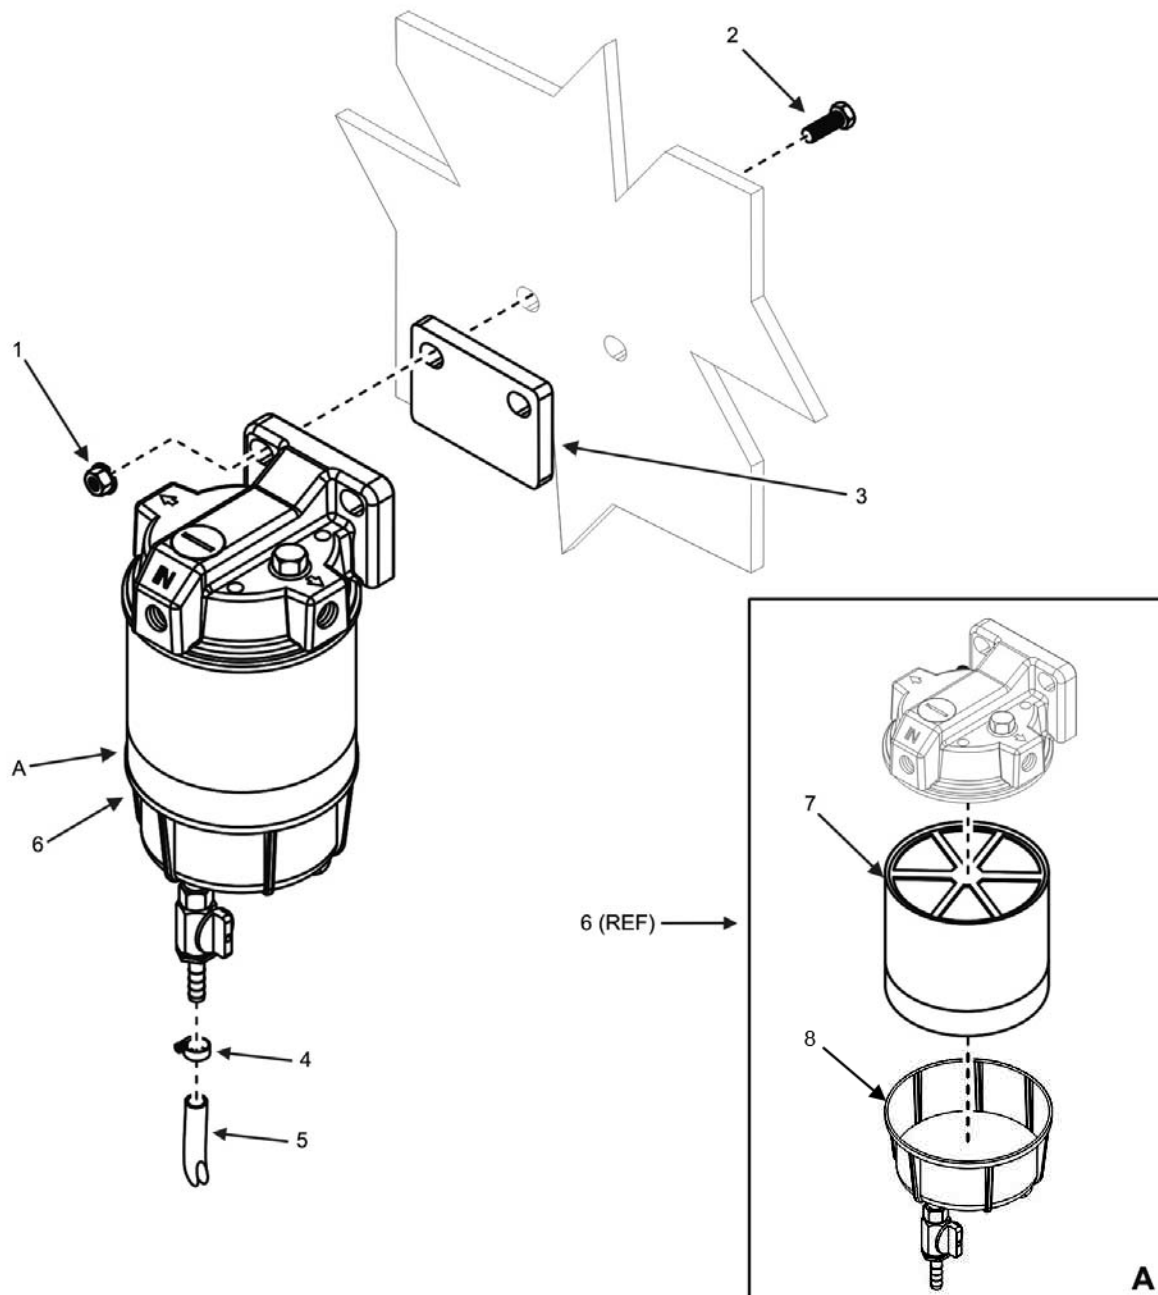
Fuel Filter/Water Separator Assembly (Sheet 1 of 3).
